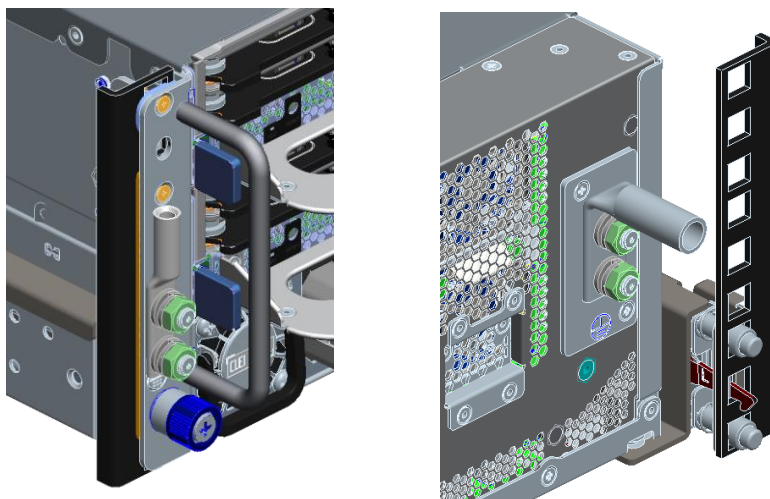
Open edge chassis front (left) and rear (right) grounding points
